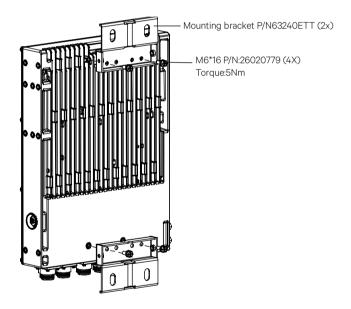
Installing the Rectifier to the Wall (Flag)
